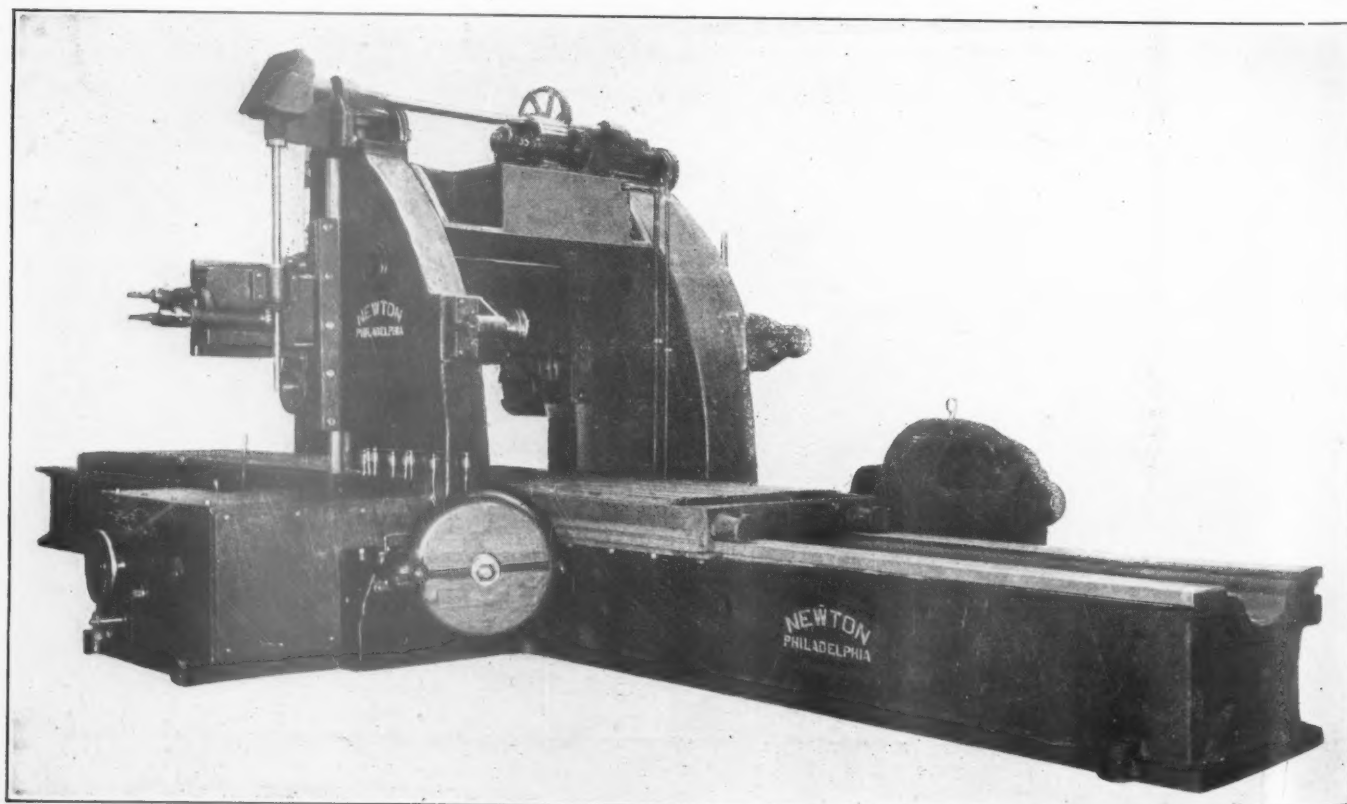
View of Newton Horizontal Milling Machine from the Rear of the Operator's Side of the Table
